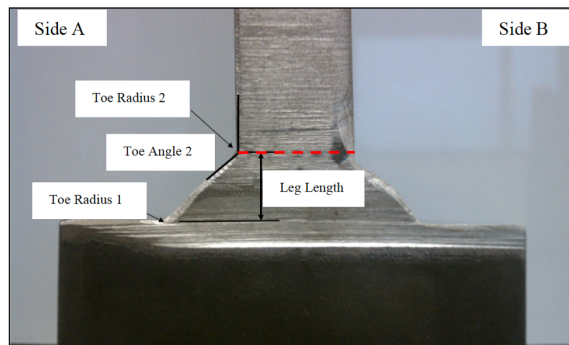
Geometry of welded specimen made of A36 steel [36]
